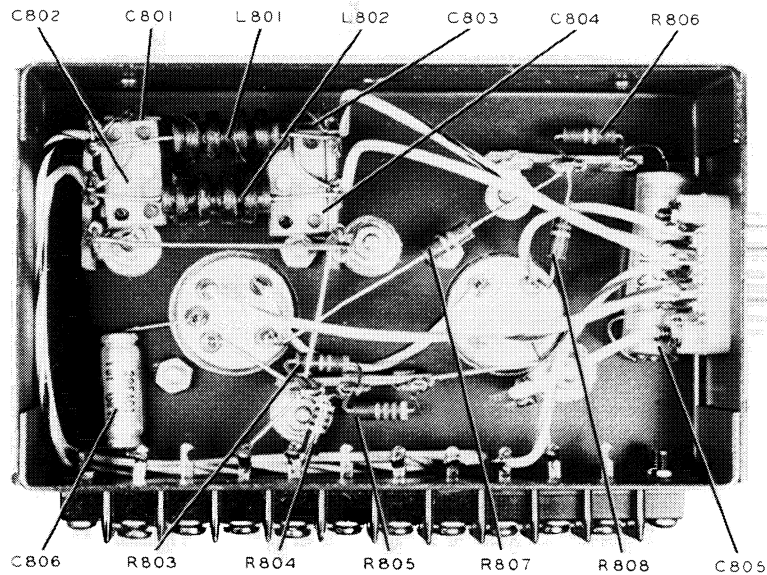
312A-2 Control/Speaker Unit, Phone-Patch Chassis, Bottom View
